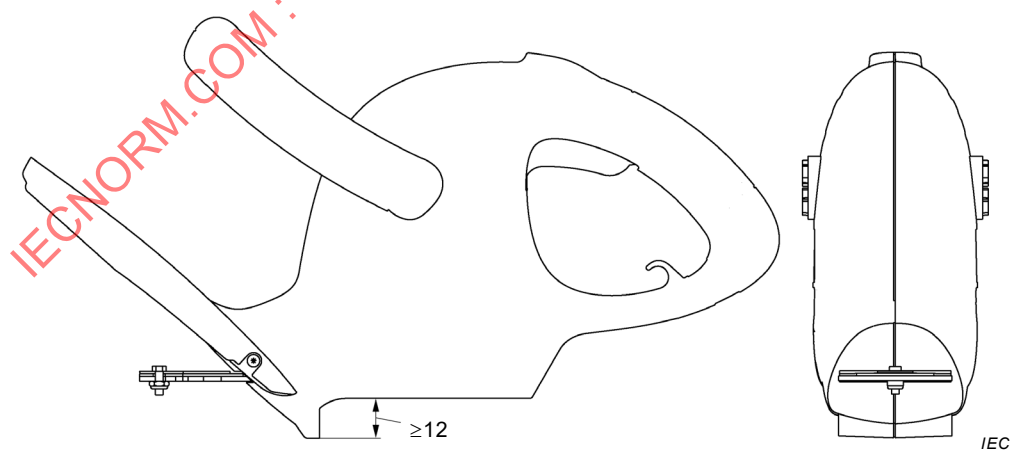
Cutting device configuration example for category 4 (see Table 101 and Table 102)
